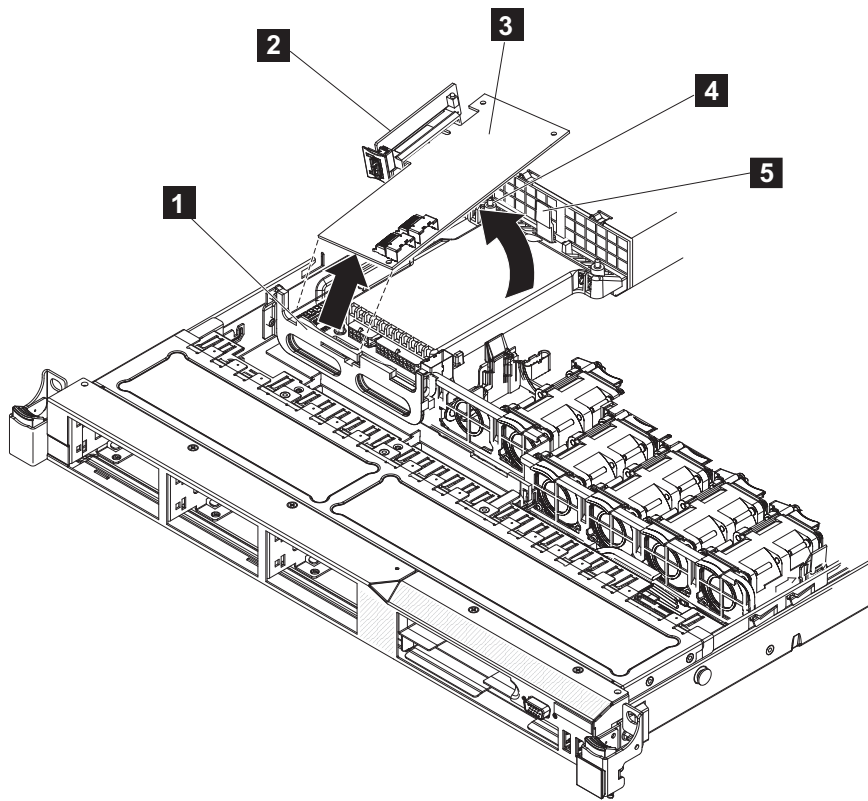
Disengaging the disk-controller front-retention bracket and removing the riser assembly and disk controller
